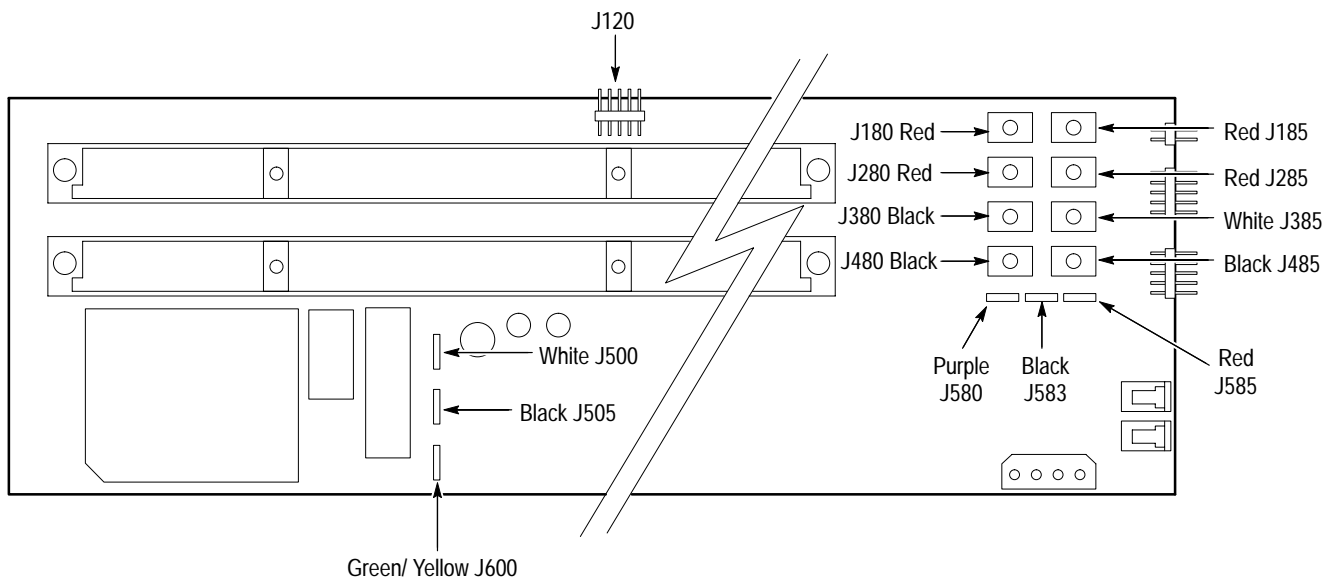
Power Supply Cables Attached to the Backplane Board
